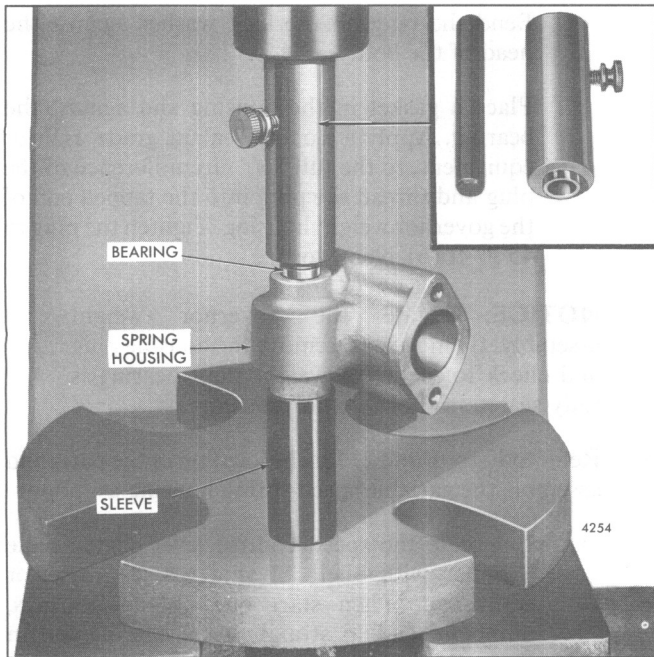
Installing Speed Control Shaft Bearings in Spring Housing using Tool J 9196
